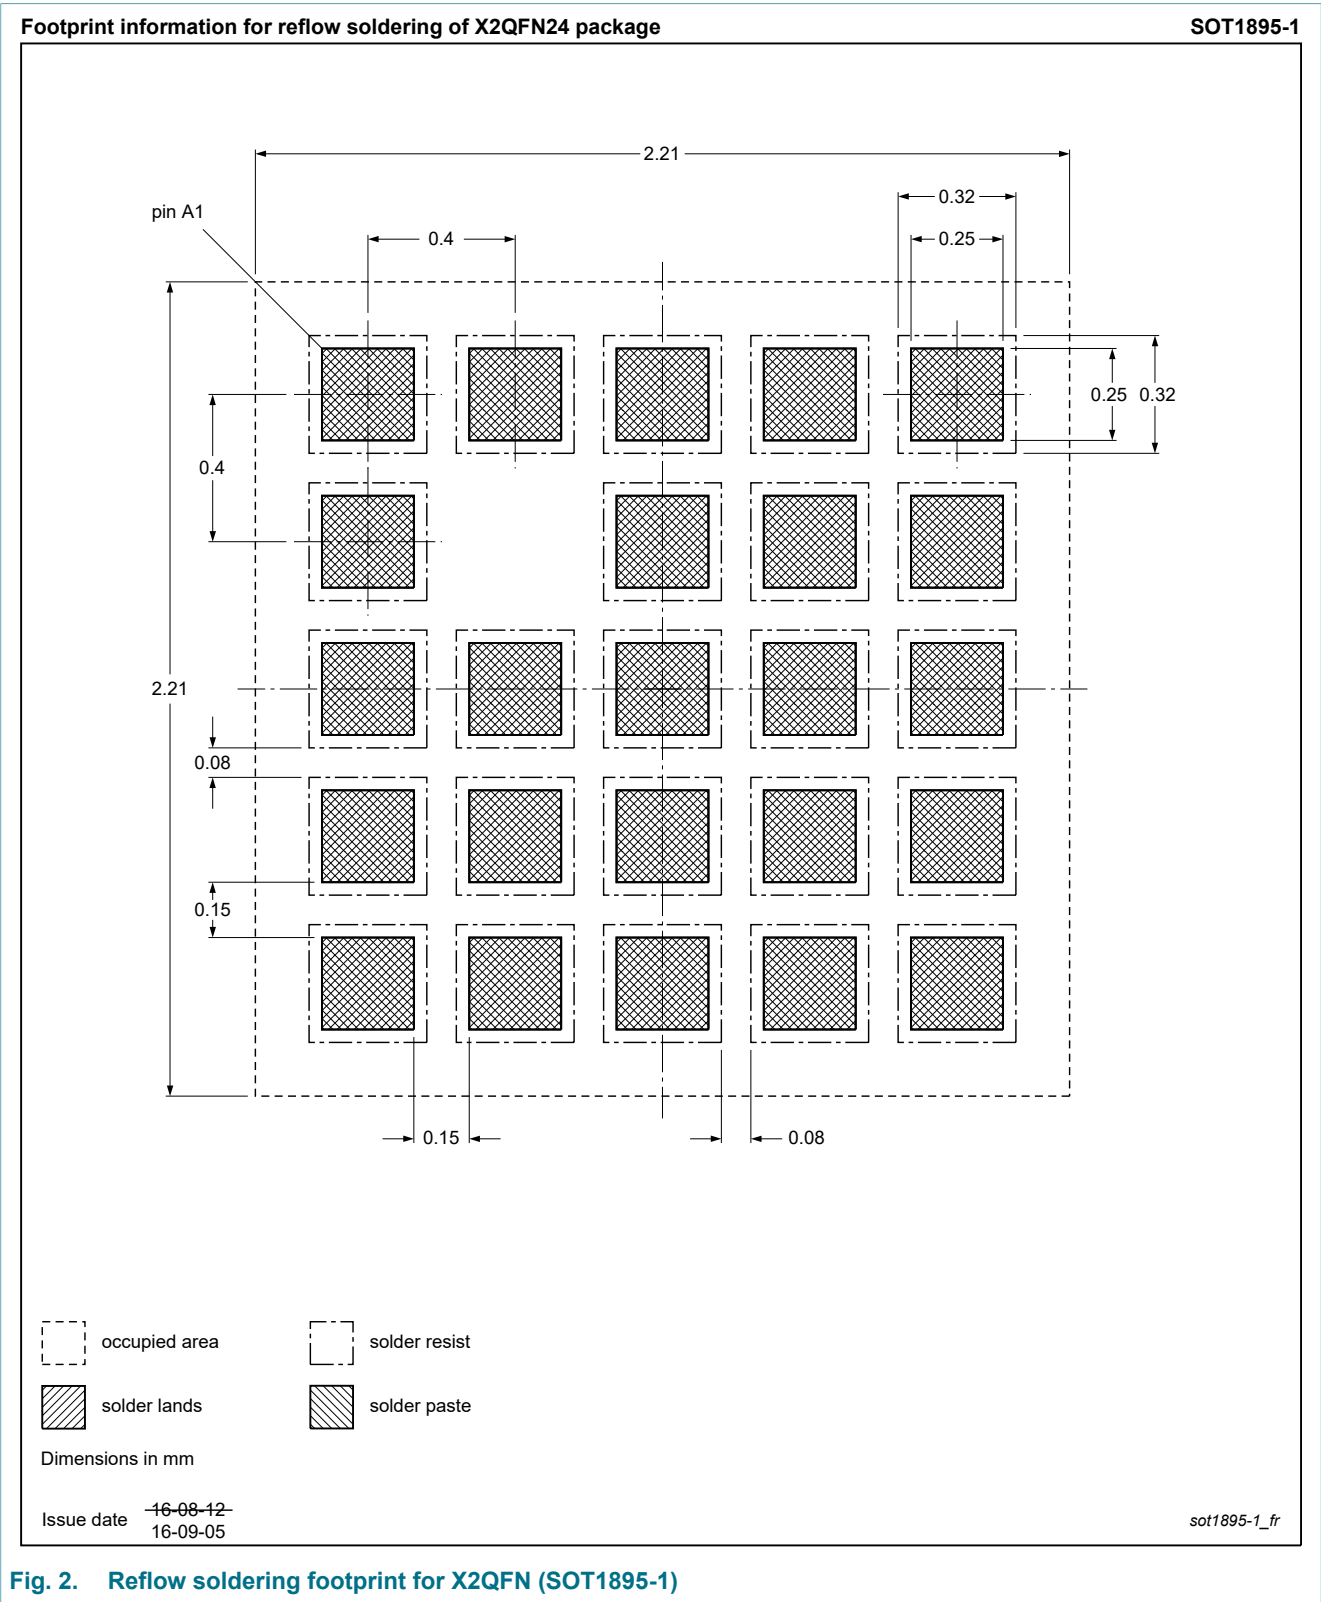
Reflow soldering footprint for X2QFN (SOT1895-1)
